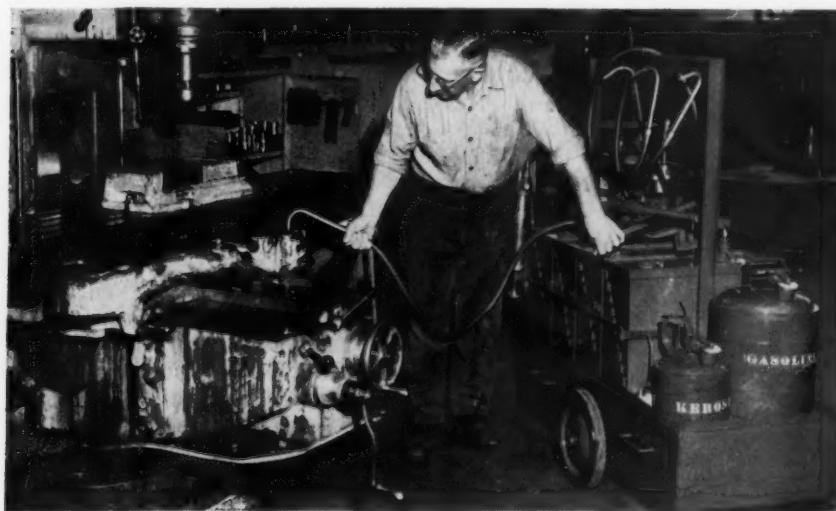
Delivery of lubricants from storage room to machine is made best by cart.
